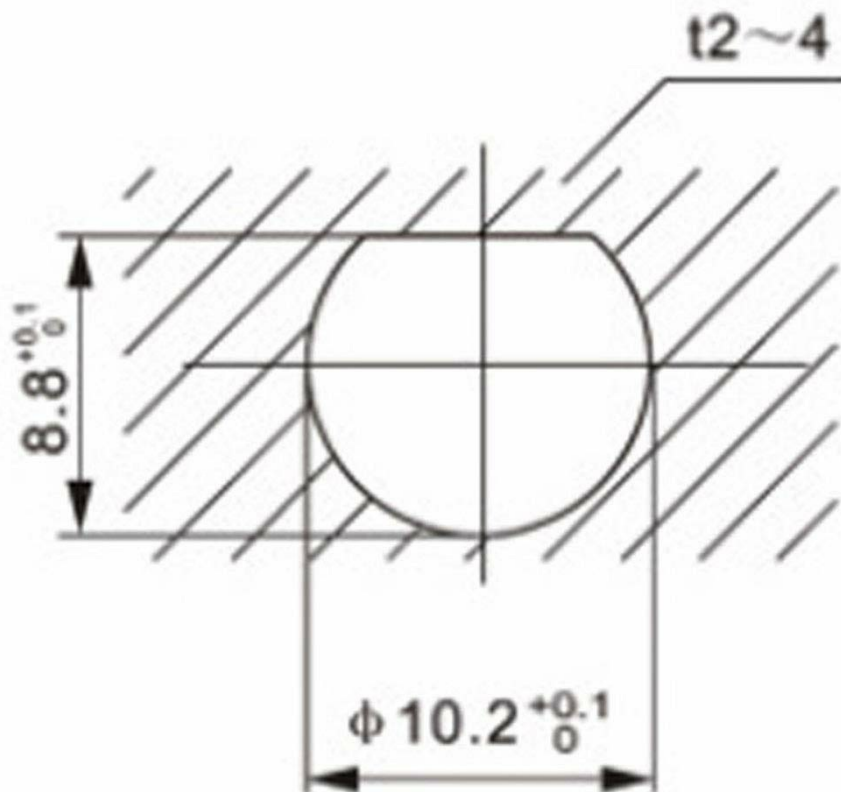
Diagram illustrating the recommended mounting hole dimensions for the KEDU RB2 switch, including diameter and panel thickness range.
